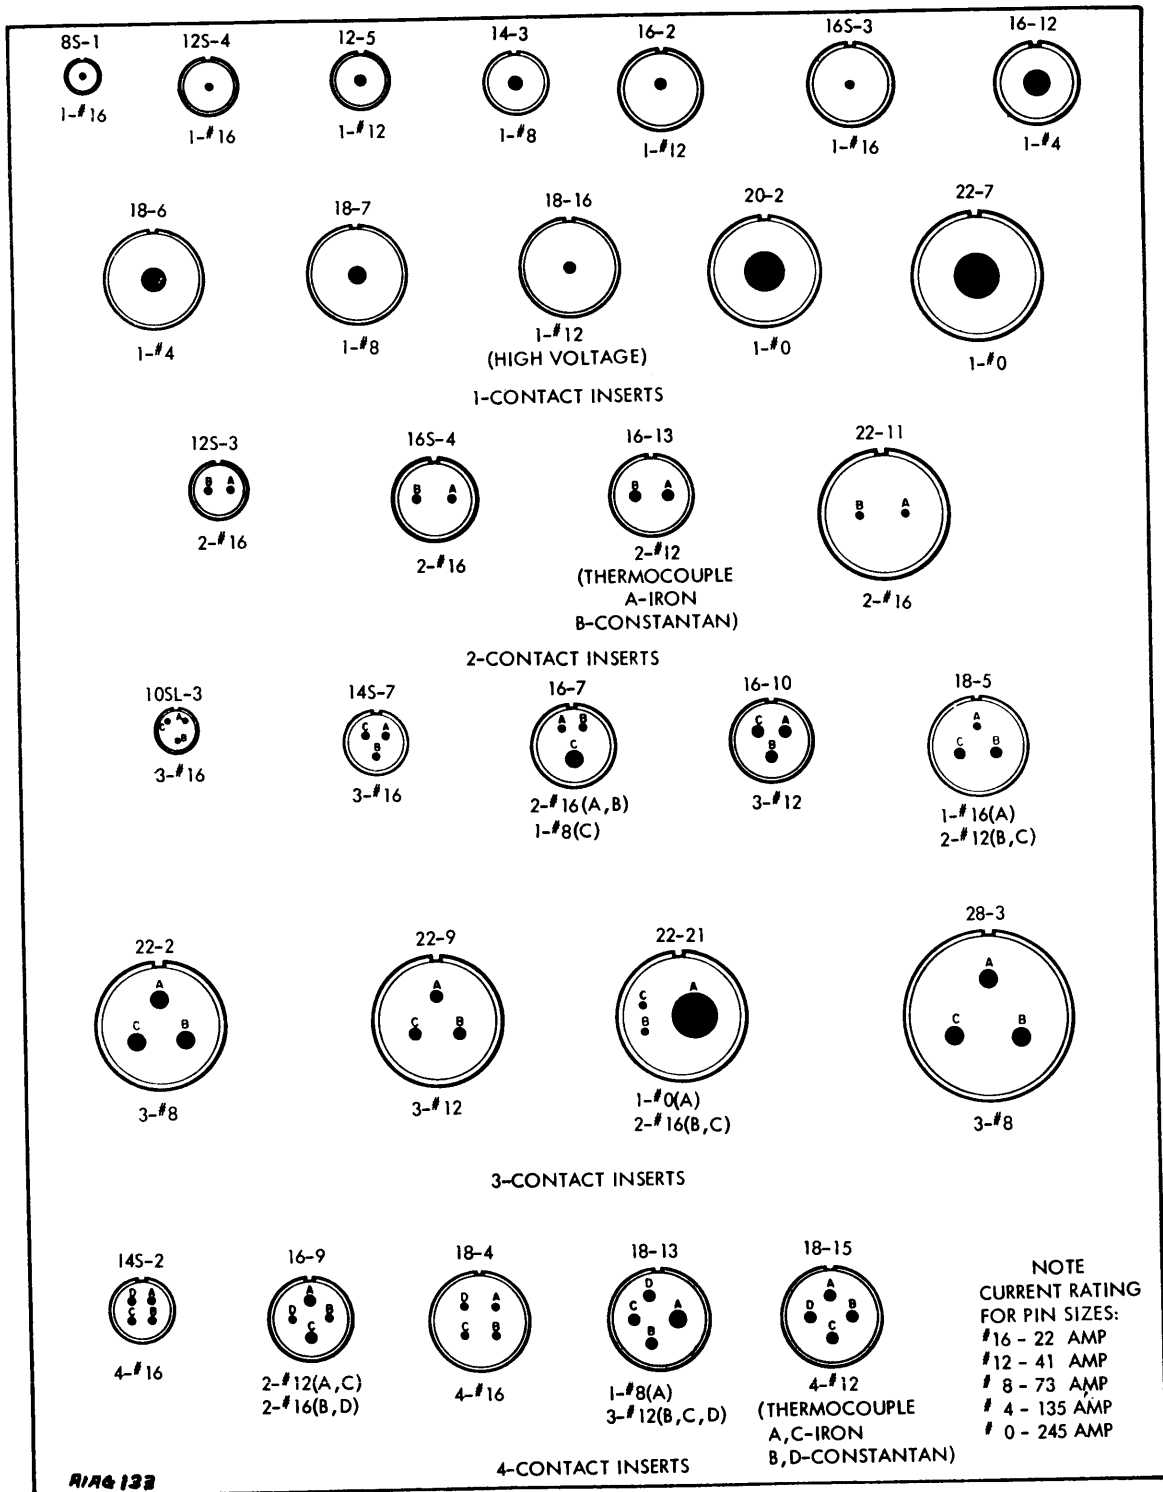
Connector Insert Arrangements (Sheet 1 of 8)
